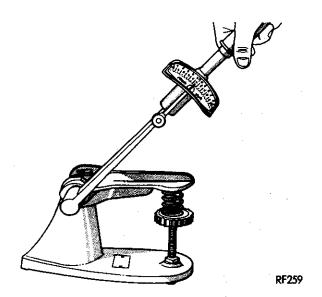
Testing Valve Spring for Compressed Length with Tool C-647
